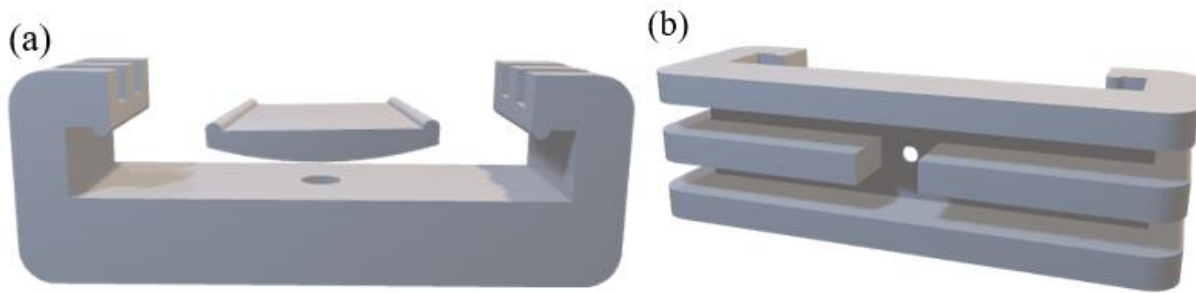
SolidWork model for four-point bending specimen. (a) Front view; (b) Bottom view.
